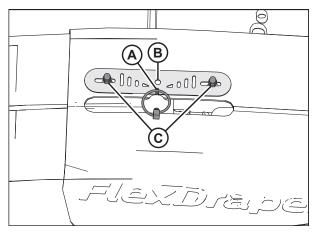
Wing Movement Indicator on Top of Flex Linkage Cover – Left Side Shown
